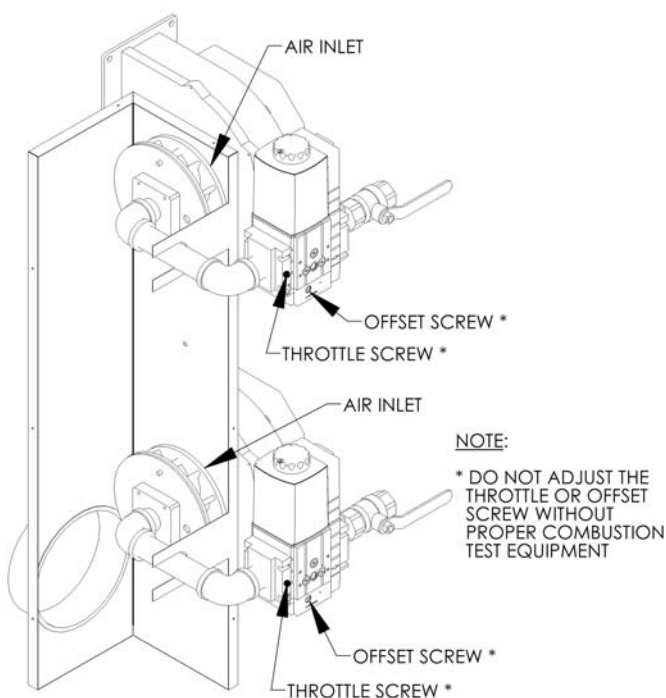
Gas Valve, Venturi, Blower Assembly – PF-1500
